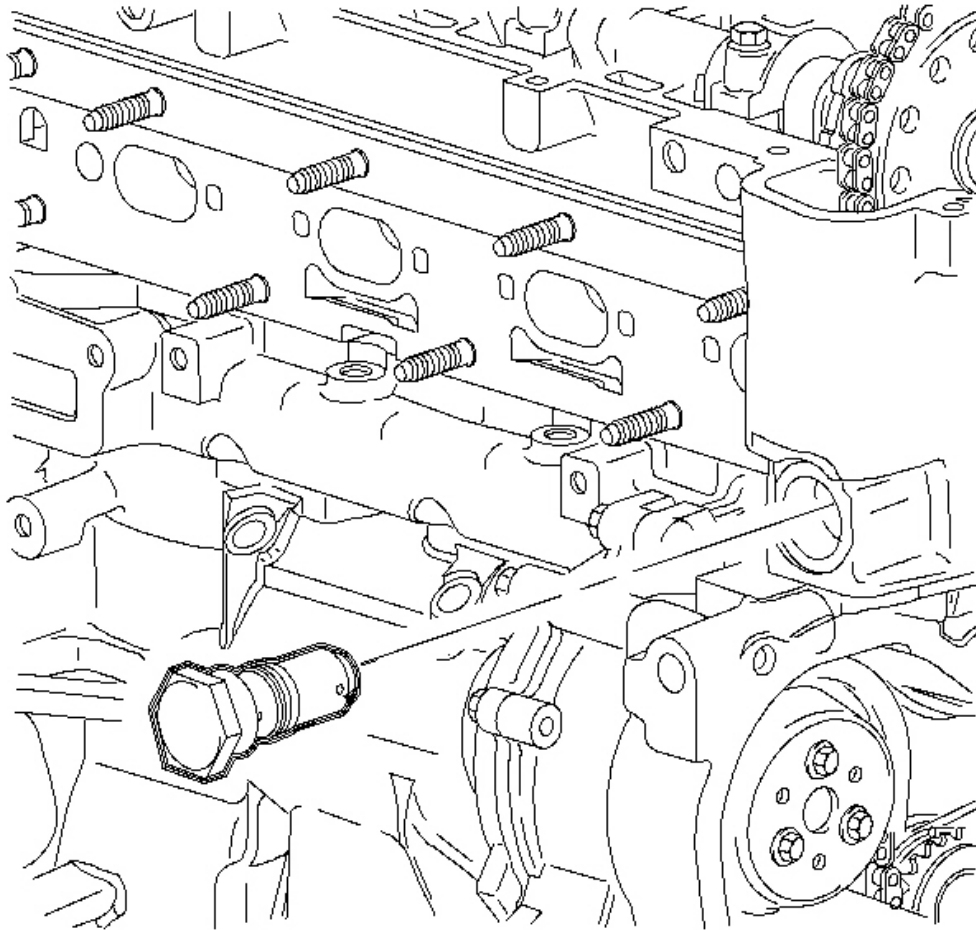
Removing/Installing Timing Chain Tensioner Assembly
